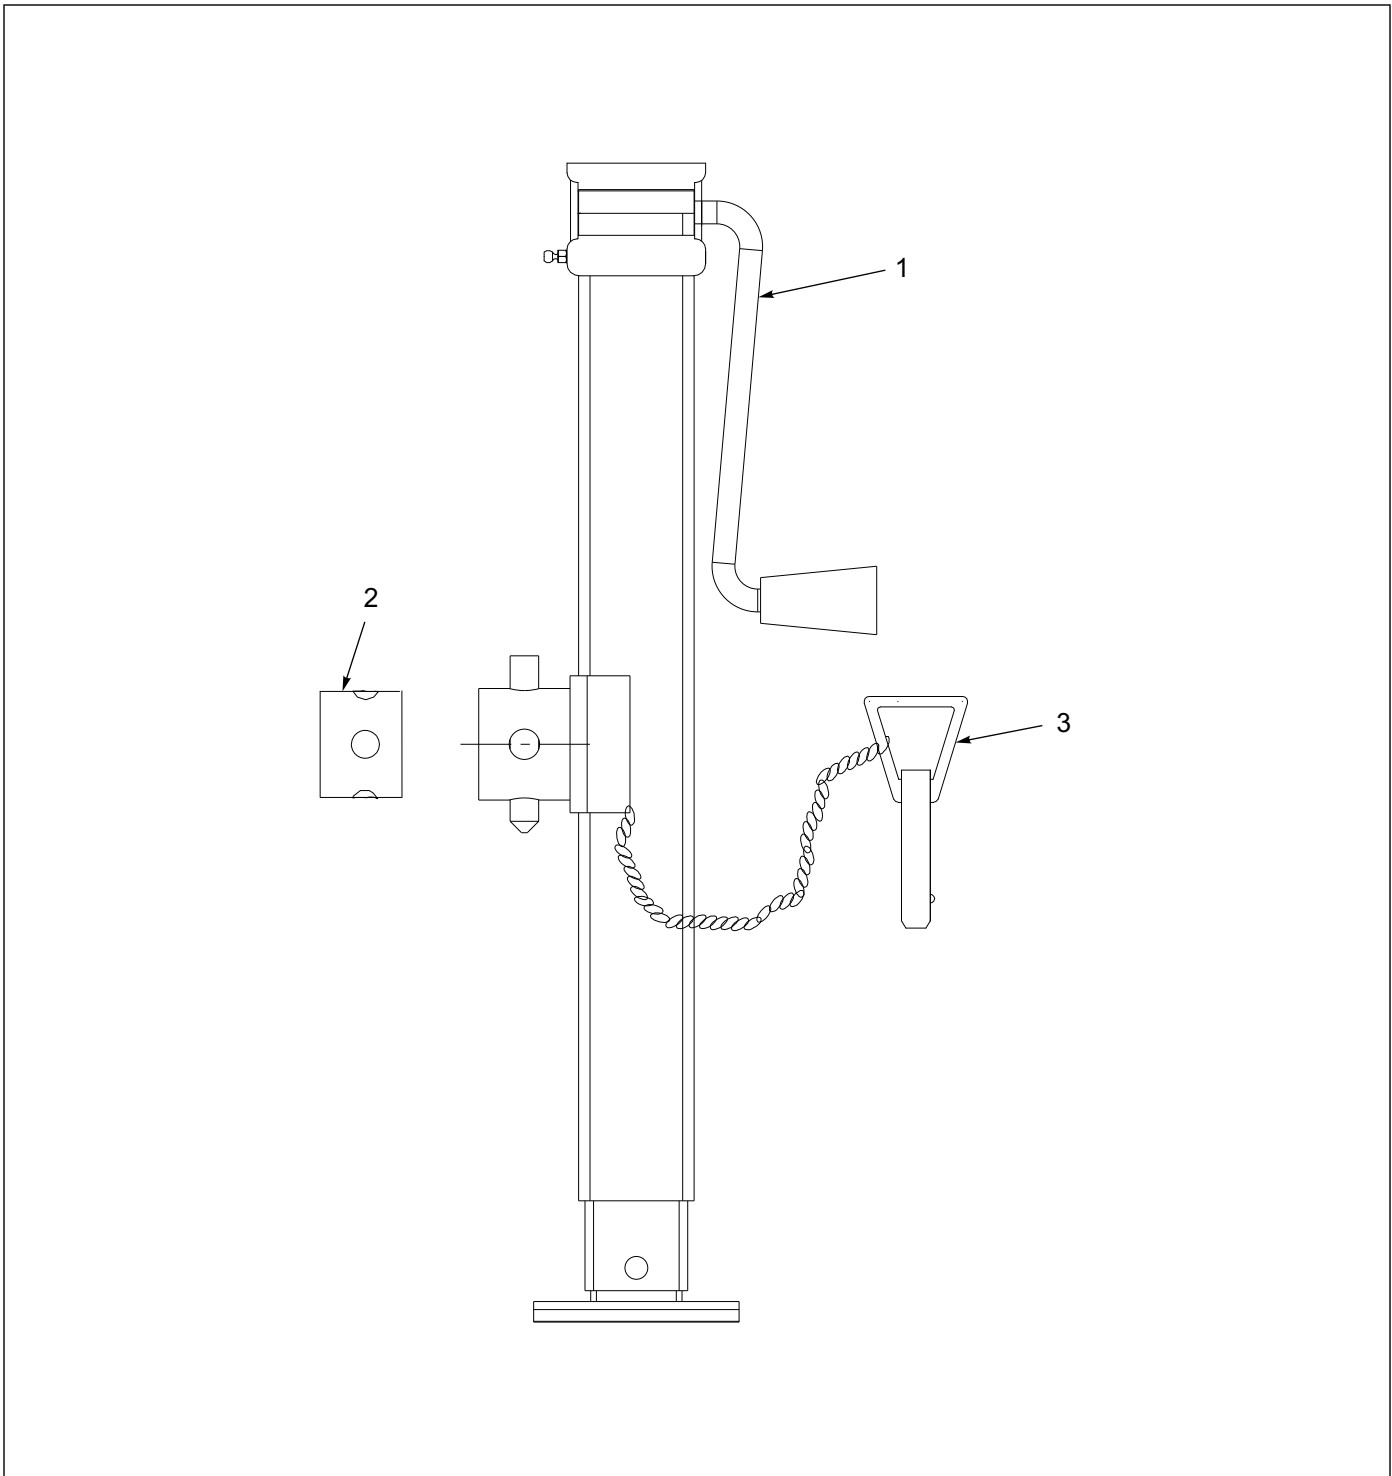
7,000 Lb. Sidewind Jack Assembly
